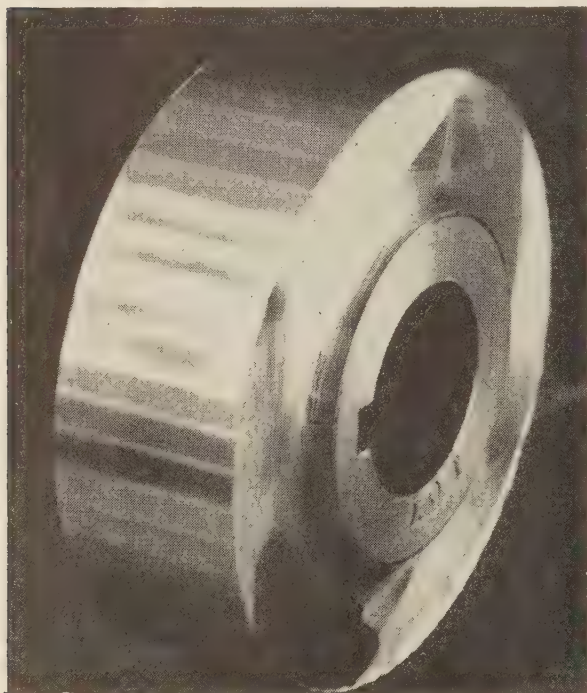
TEST ROLL NO. 109, CARBON MACHINE STEEL
